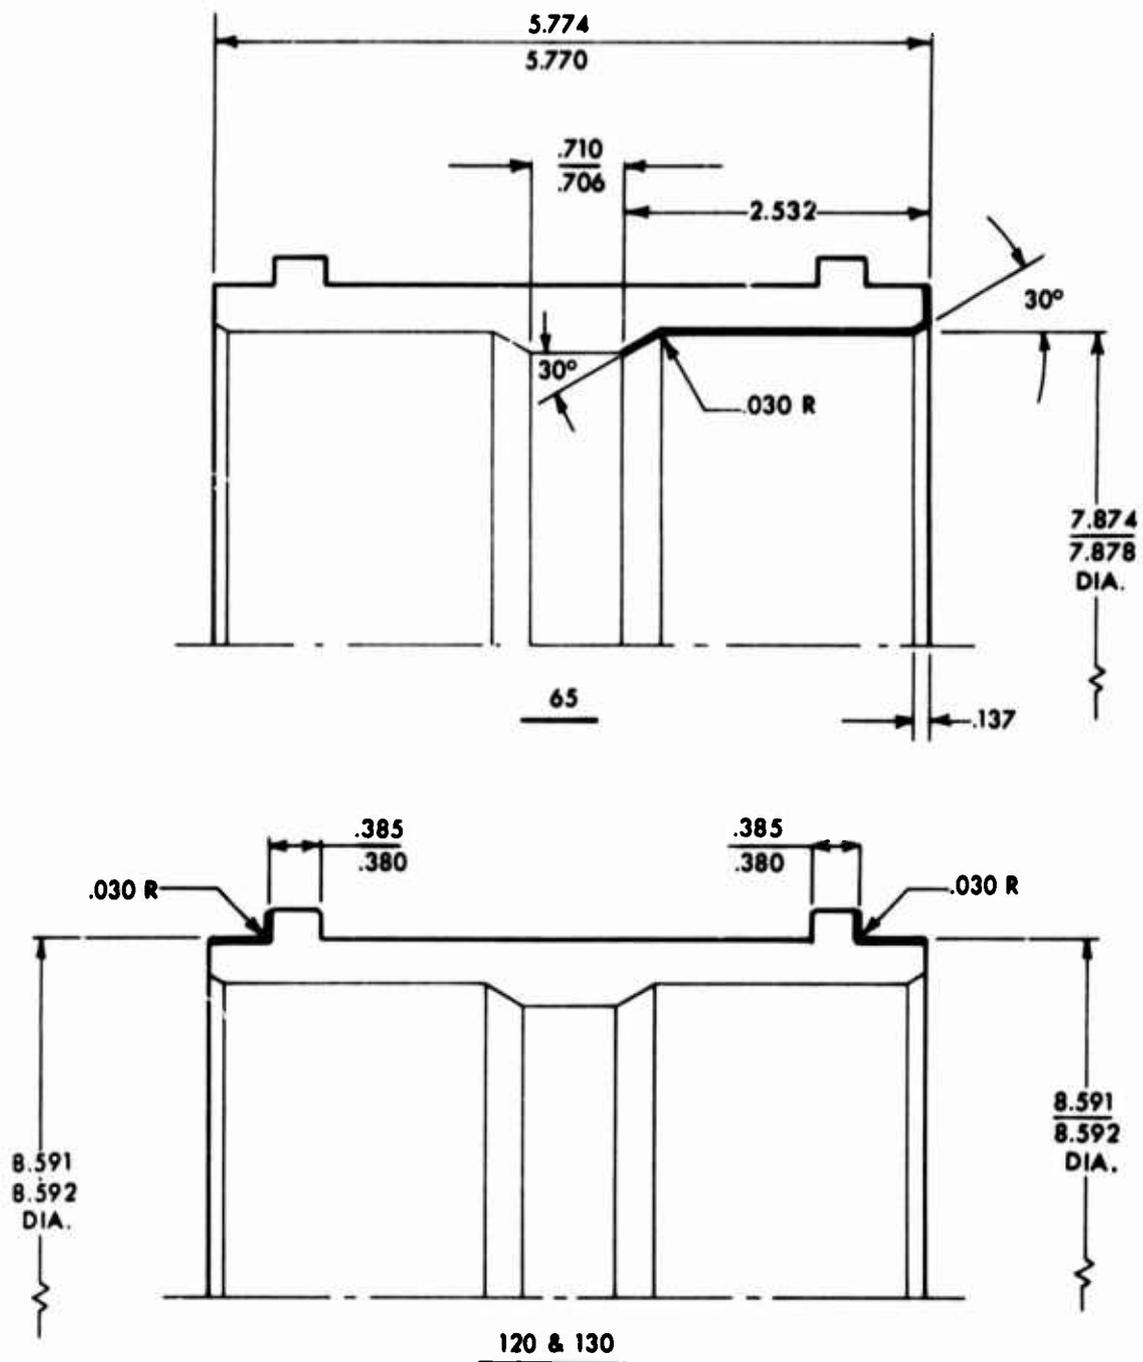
RG351-11183-041, Machine Operation Drawing. (Sheet 3 of 4).
